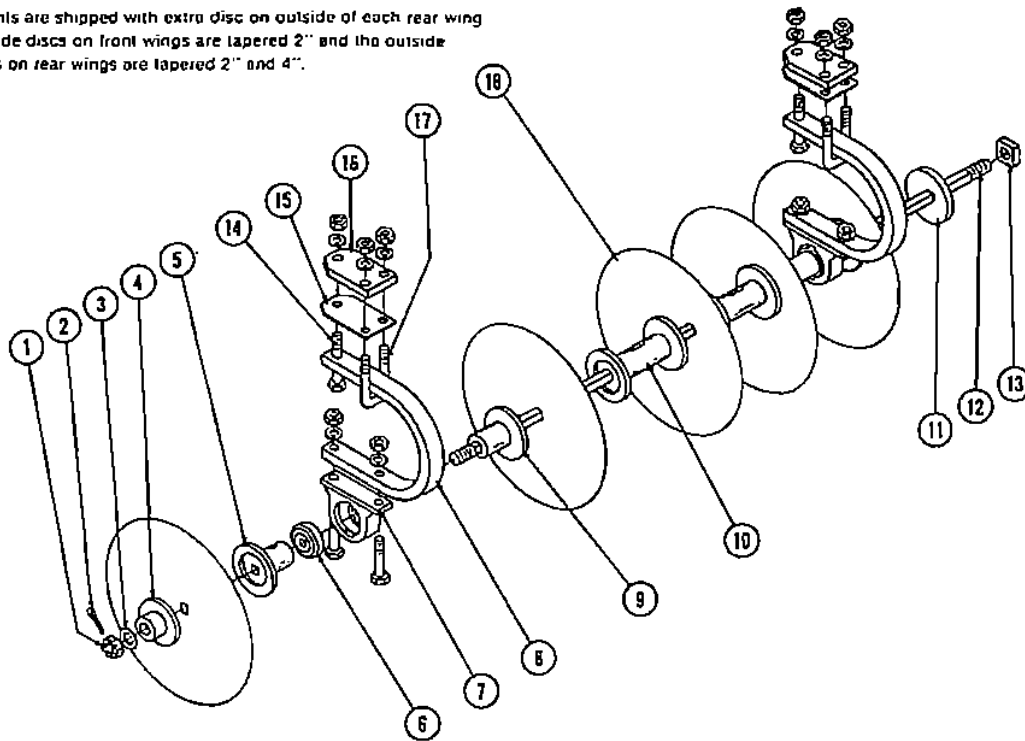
SPRING BEARING CONNECTOR DISC GANG ASSEMBLY
